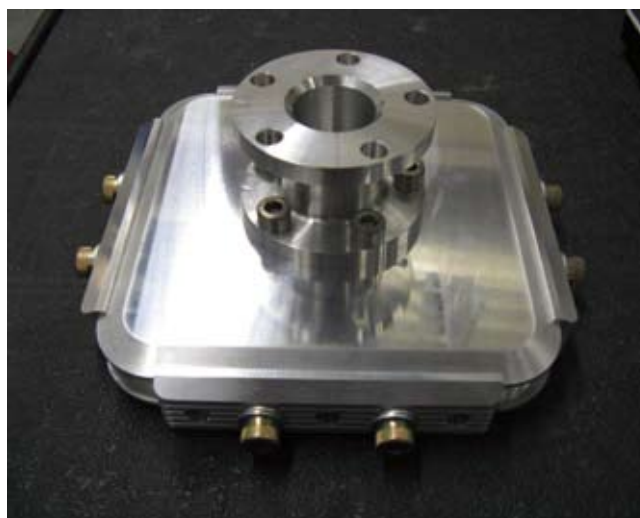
One of the metal prototypes of the vacuum chucks used in the test system.
